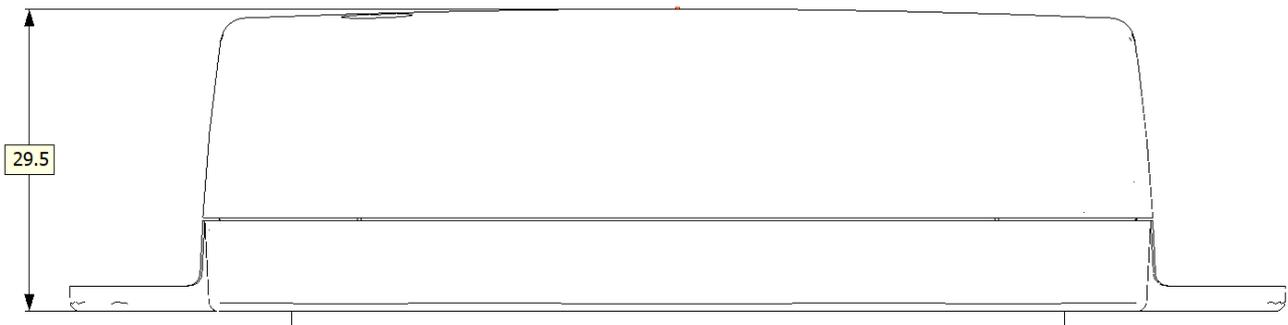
LDSBUS Thermocouple Sensor Adapter Dimension – Side View
